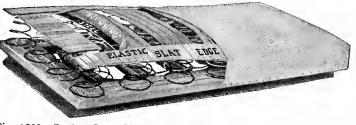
Spring Seat, Showing the Use of Slat and Webbing and the Elastic Slat Edge.
